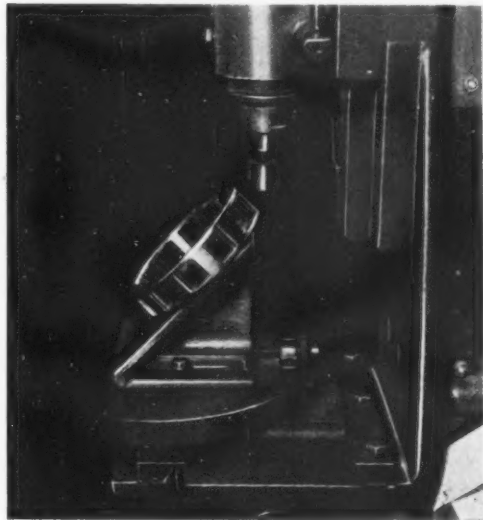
Typical Set-up for De-burring the Bottom Corners of the Roller Pockets, at the External Diameter, with a Concave, Face-type, Rotary Burr
